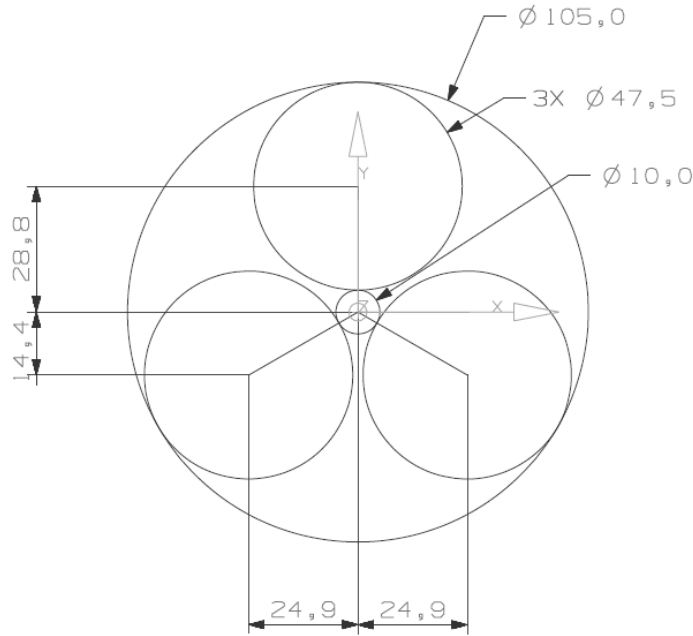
Initial dimensioning of the fog lamp housing; all dimensions are in mm
